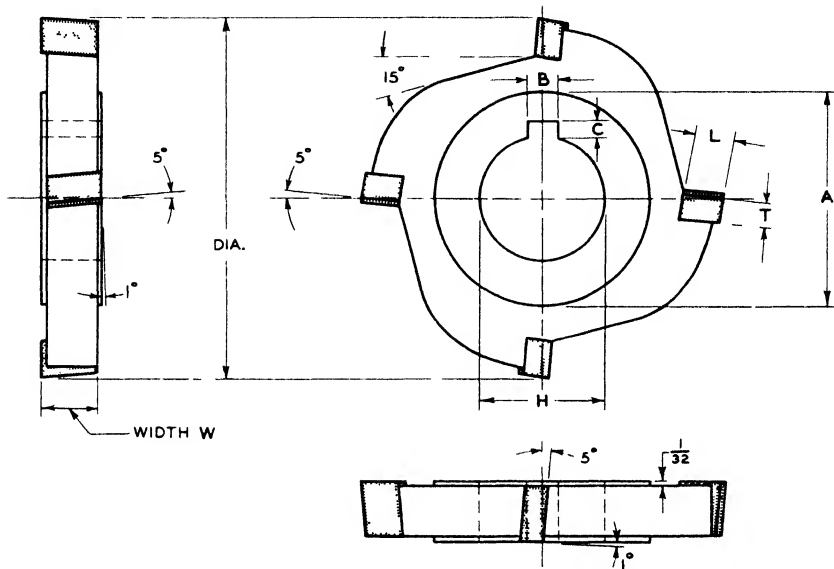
Details of the Staggered-Tooth, Slot Milling Cutter, Specifications of Which Are Given in Table VII
